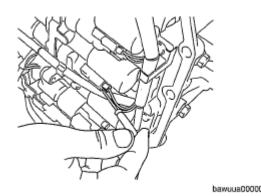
Tapping Control Valve Body Cover Courtesy of MAZDA MOTORS CORP.
